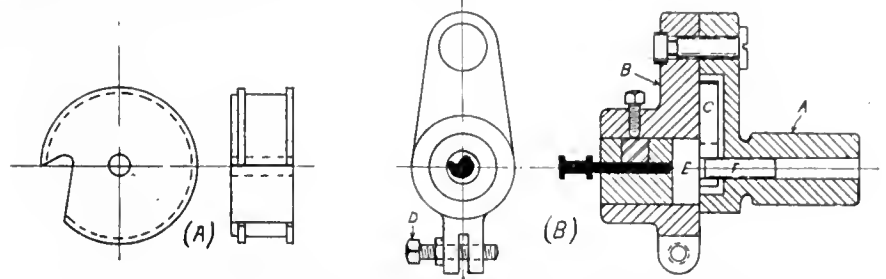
DESIGN OF FORMING AND RECESSING TOOLS.
